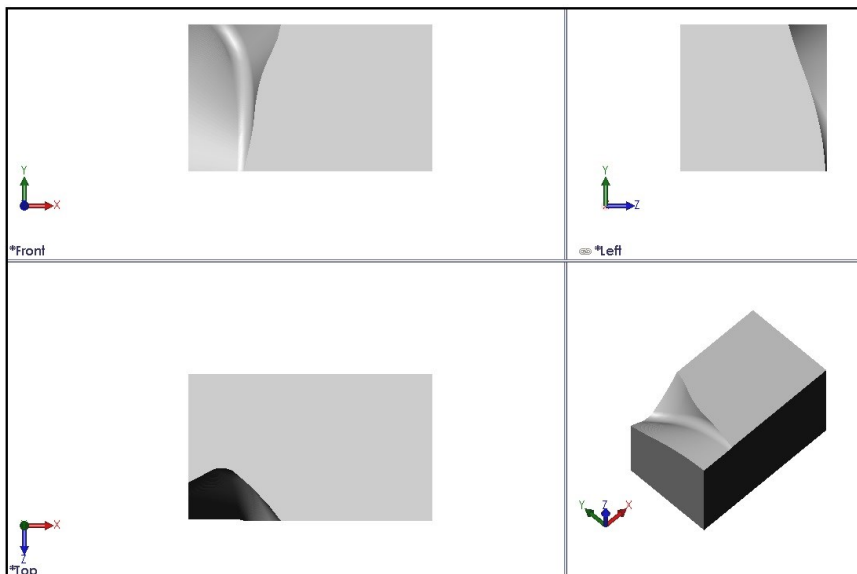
Output for tool path in Annexure 2 for torus end mill.
